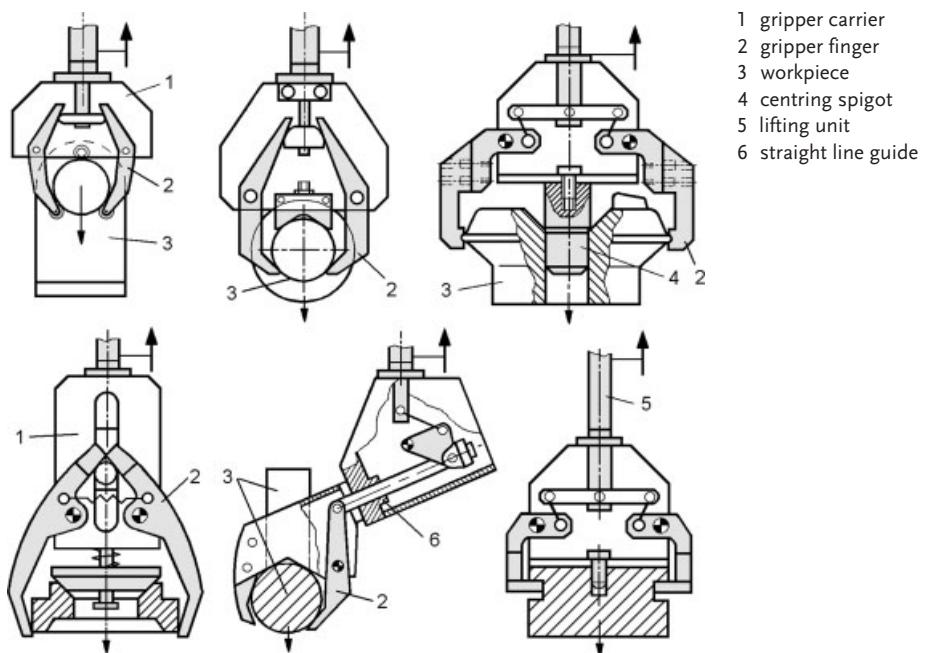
Gripping of machine components with uncontrolled gearfree grippers (*Kahlman*)
